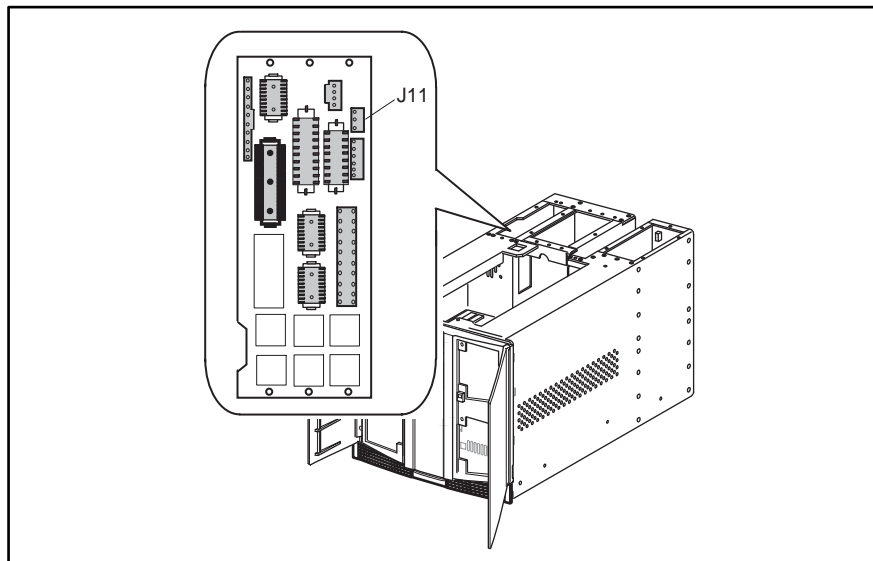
Disconnecting flex cable at J12 (need to modify J location)
